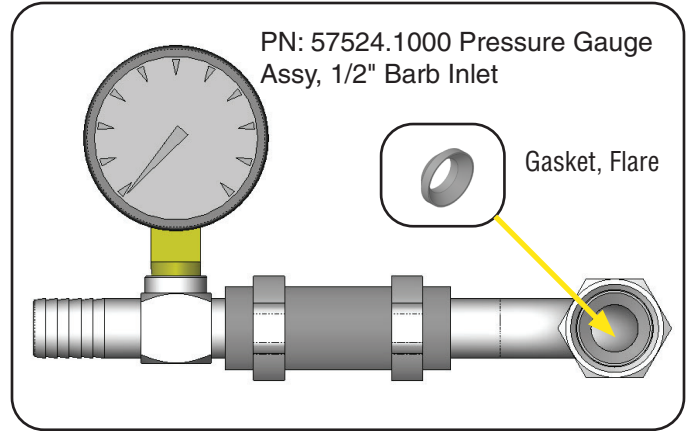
Plumbing Connection - 1/2" Barb to 1/2" FFL
